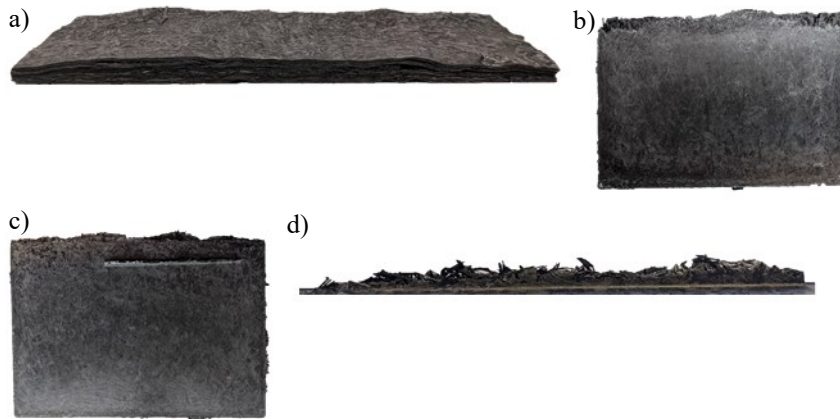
Plate production: a) typical charge with five entire layers and a sixth partial layer placed between the third and fourth layer; b) exemplary incompletely filled plate; c) exemplary incompletely filled plate with rib; d) detail of incompletely filled rib.
